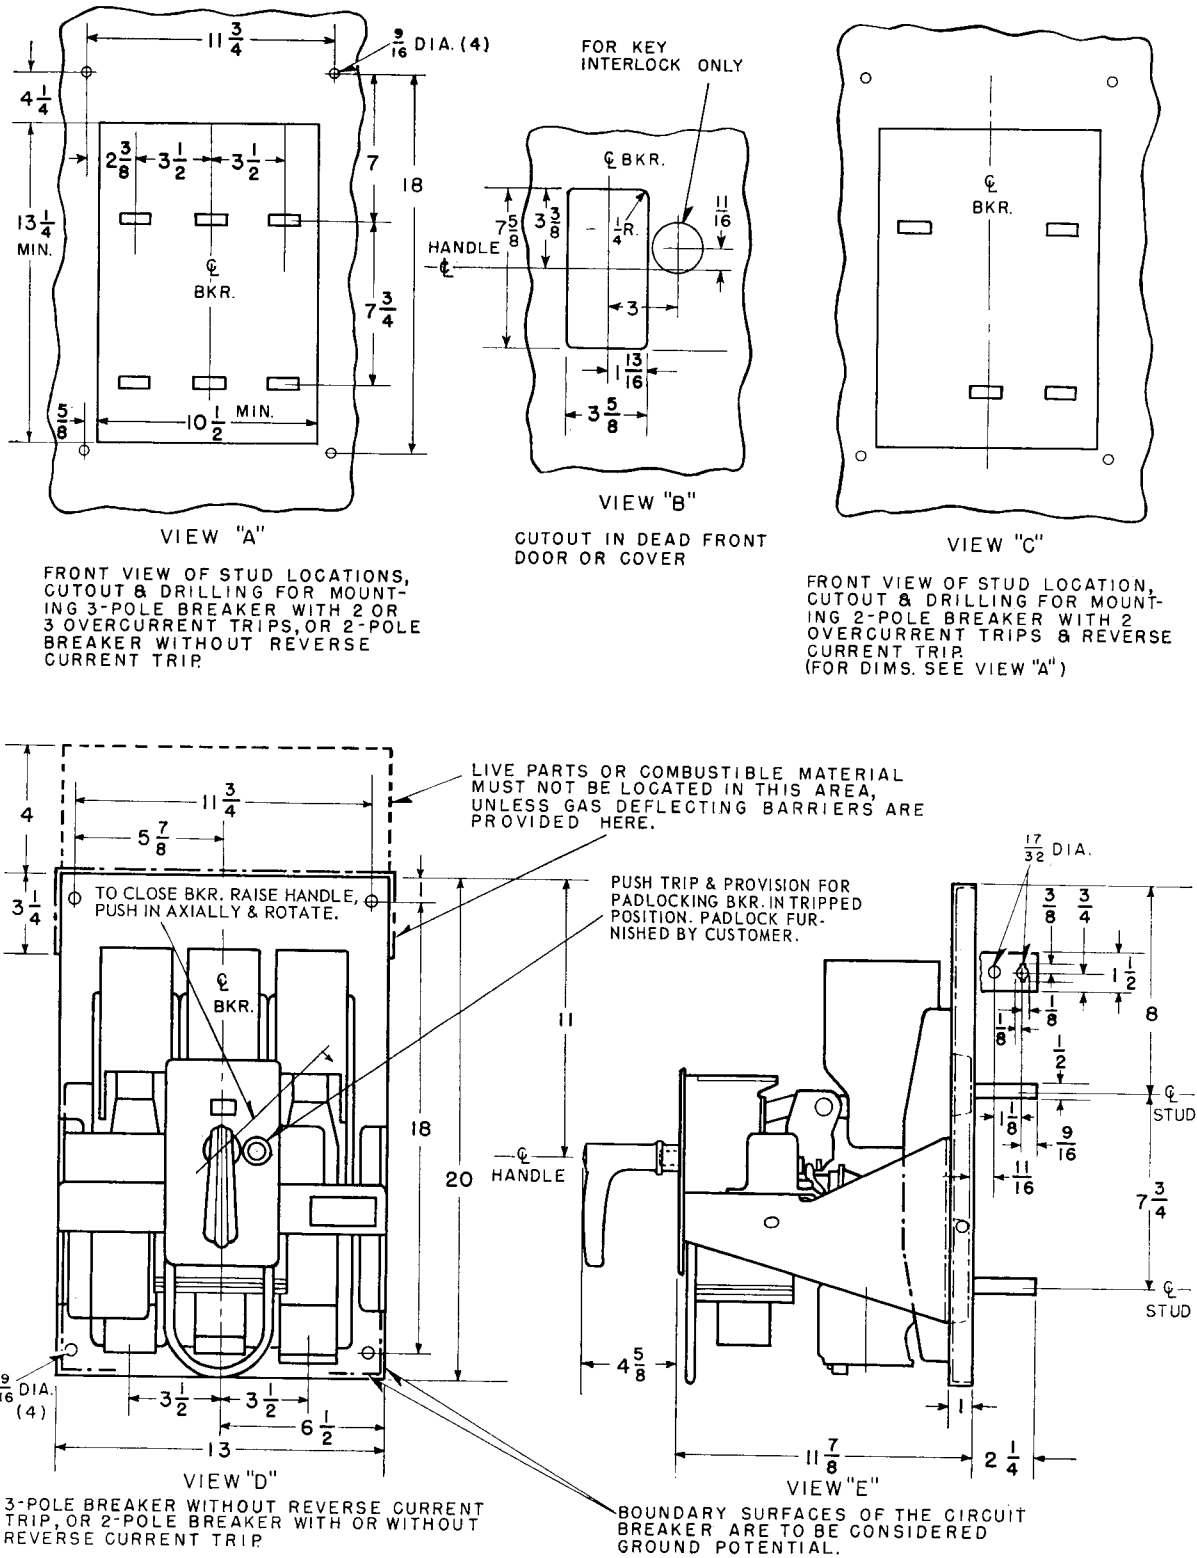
DB-25 Outline Dimensions and Mounting Details
